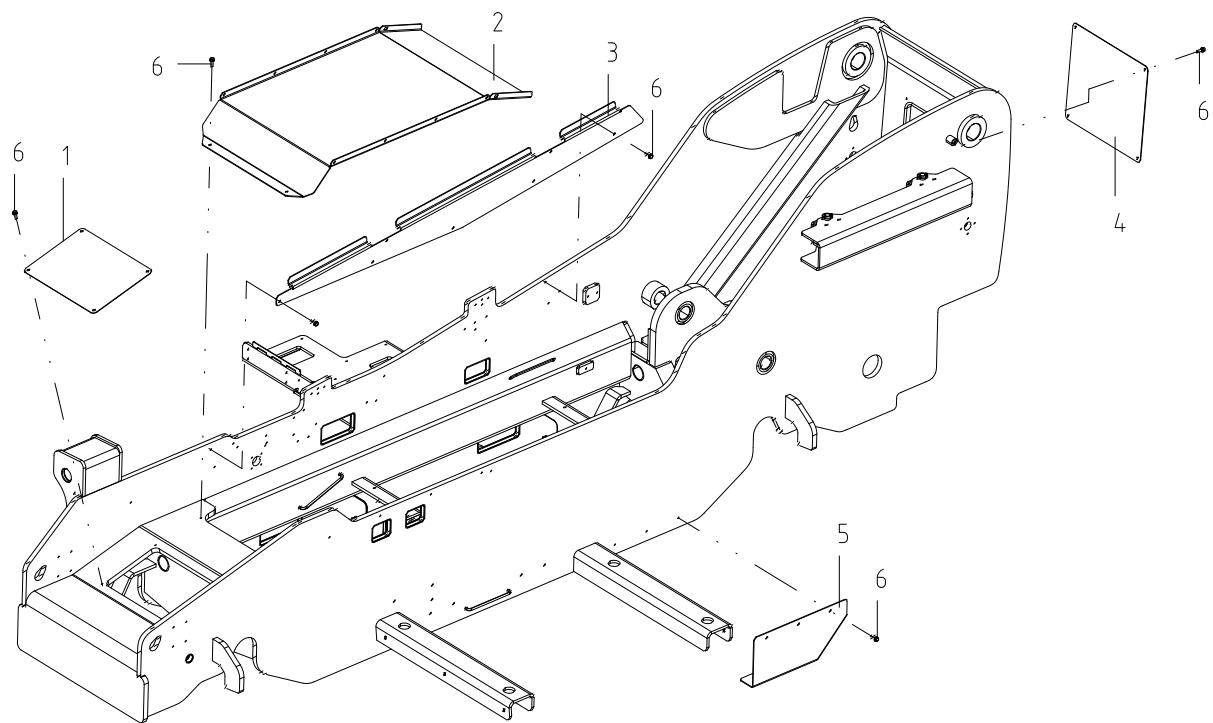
Cover Assembly (T35-100XHYG)
